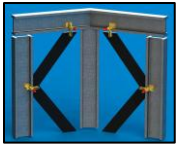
Hydraulic, movable trailer framing jig (http://www.mrtrailer.com/t_pic/titan157.jpg)
